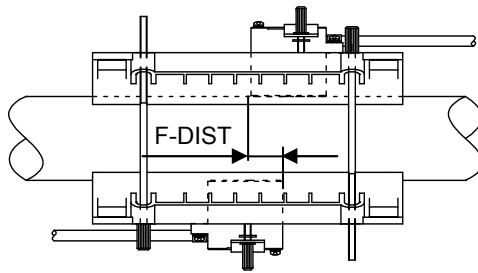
A: Mounting method for a pipe size of DN50mm or less
